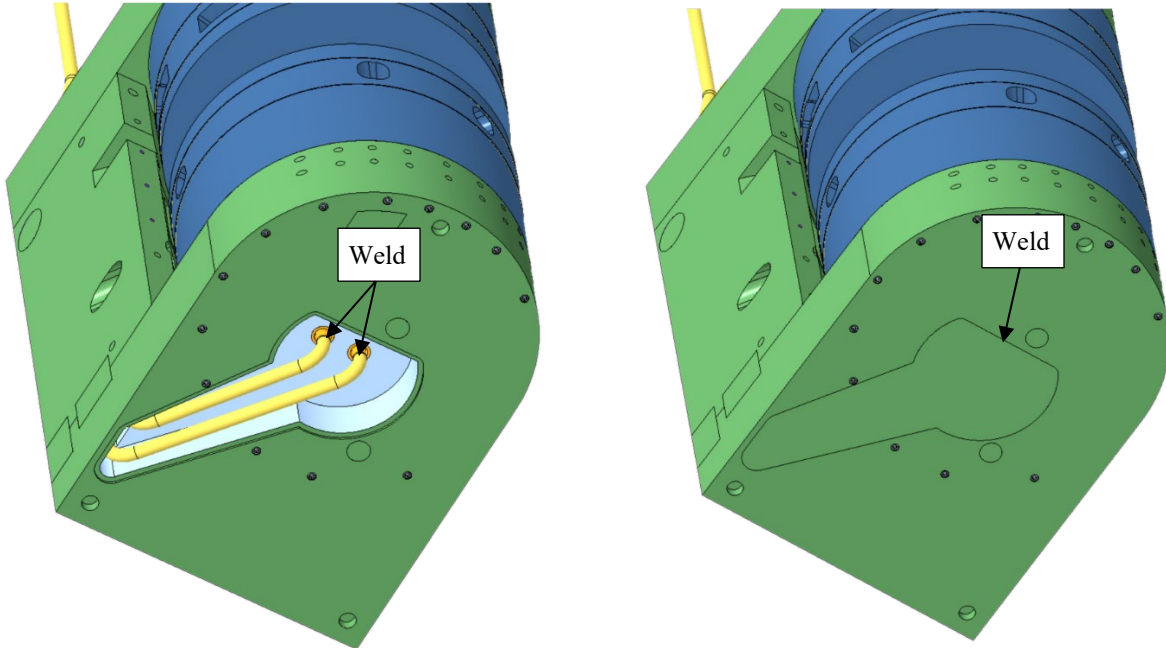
Lower hydrogen line welding (left) and lower vacuum cover plate welding (right).
